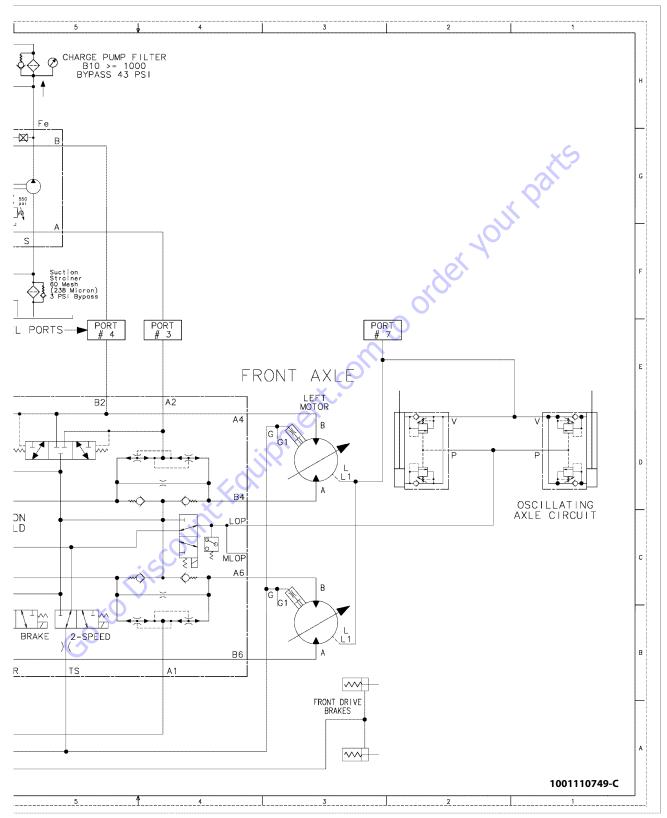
Hydraulic Schematic - Drive System Bosch/Rexroth Pumps - Sheet 2 of 2
